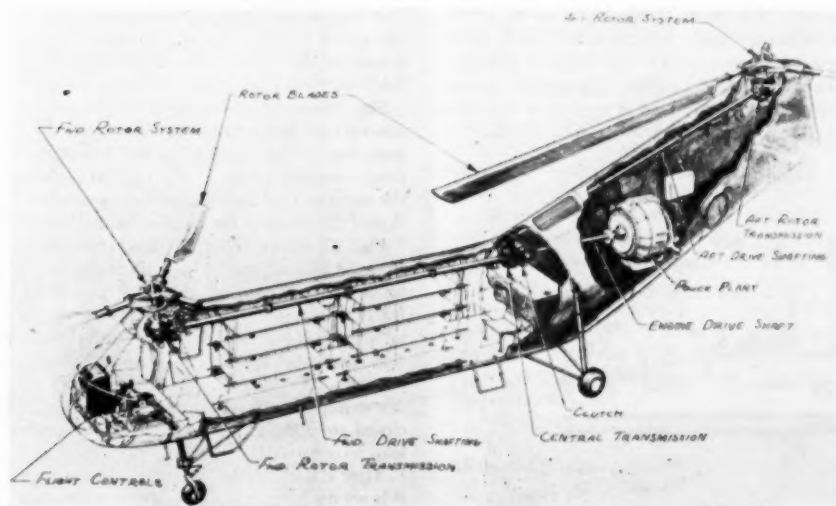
CUTAWAY VIEW SHOWING HRP-2 DRIVE SYSTEM
